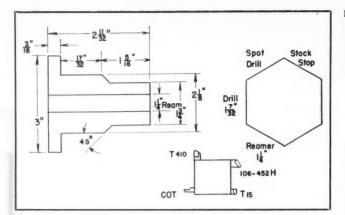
For turret lathe work, additional information is compiled on the back of the application card, including a sketch of the workpiece and the tools used on each operation.
